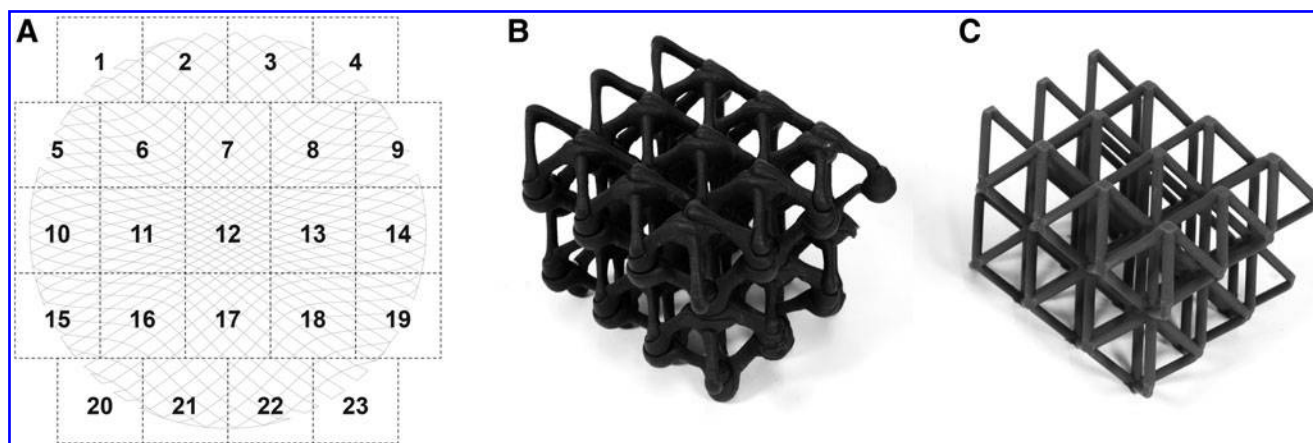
(A) The largest print completed on the RLP system was a 25" diameter table with a 3" depth, printed in only 28 min. If this were printed by using a standard SLA printer with a 145 × 145 mm work area, this table would need to be broken into 23 sections and glued together. The *gray lines* represent the toolpath for printing, and the *dotted boxes* show how the table would be broken into sections. (B) This 4" × 3" × 4" flexible rubber lattice was printed on the RLP system in only 3 min and 46 s. (C) Using an SLA printer, the same lattice would take 8 h and 45 min, or 525 min, more than 139 × longer. SLA, stereolithography.
